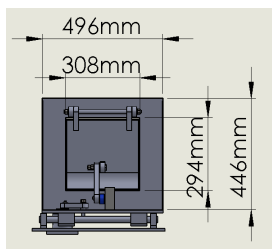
Dimensions of the contact surface between the back pad and the chair's back.
